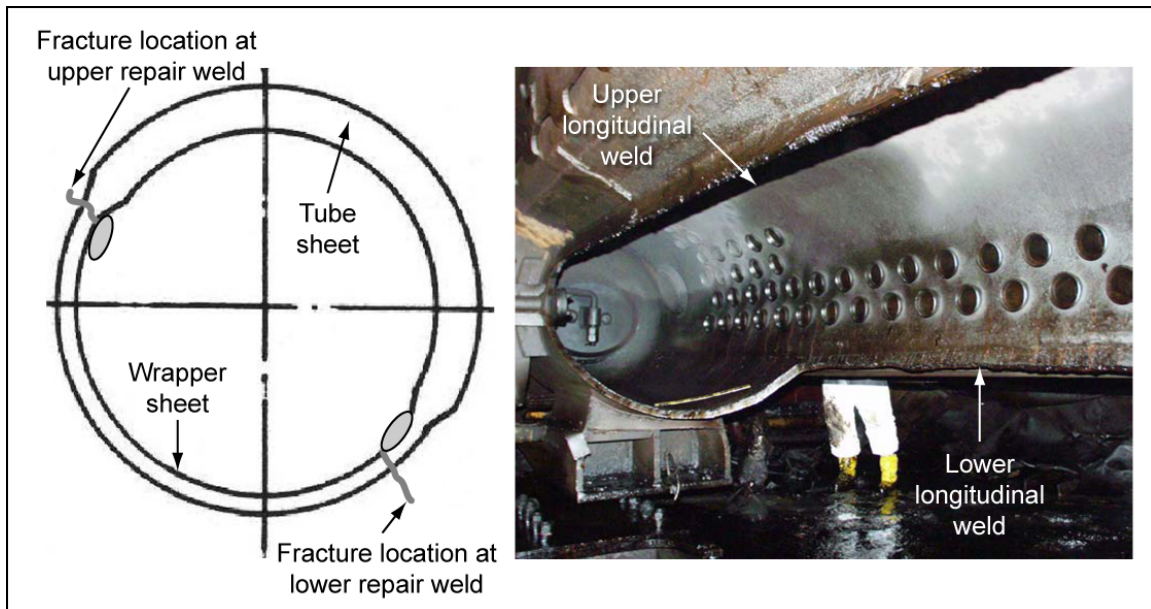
Schematic (left) showing location of fracturing along the longitudinal welds, and partial view (right) of damaged waterwall header, looking aft. The waterwall header was constructed by longitudinally welding together two half-cylinders and then welding caps (dished heads) on either end. The two half-cylinders were of different thicknesses. During the manufacture of the header, the tube sheet was tapered down to the wrapper sheet and the two were welded together at the bottom of the tapered region. The header fractured where weld repairs had been made along the original longitudinal welds joining the tube sheet and the wrapper sheet.
